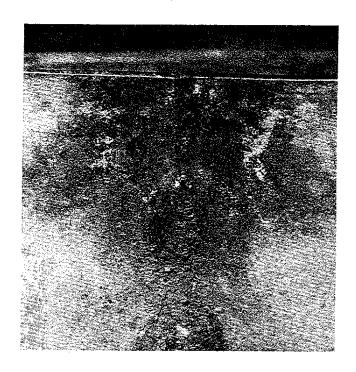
Corroded as-deposited weldments and base metal areas near the water line of Type 304L pipe exposed for 1 year to flowing well water.
